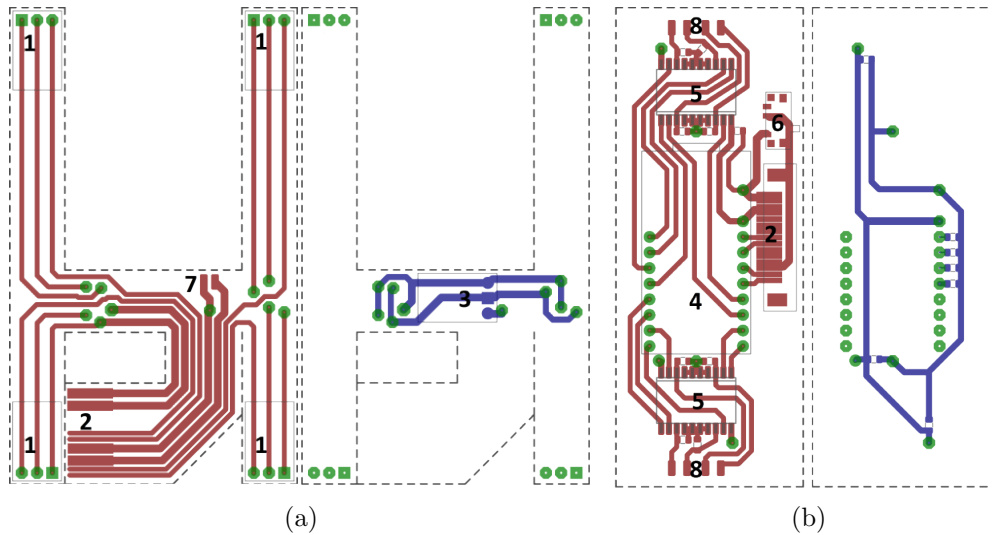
CadSoft Eagle drawing of the PCBs used in MinIAQ: (a) Inner flexible PCB for sensor connections and power regulation and distribution. (b) Main controller PCB for controls and driving the actuators. Red color lines show traces on top layer and blue color lines show traces on bottom layer. The labeled numbers indicate the soldering position of components and connectors described in text.
